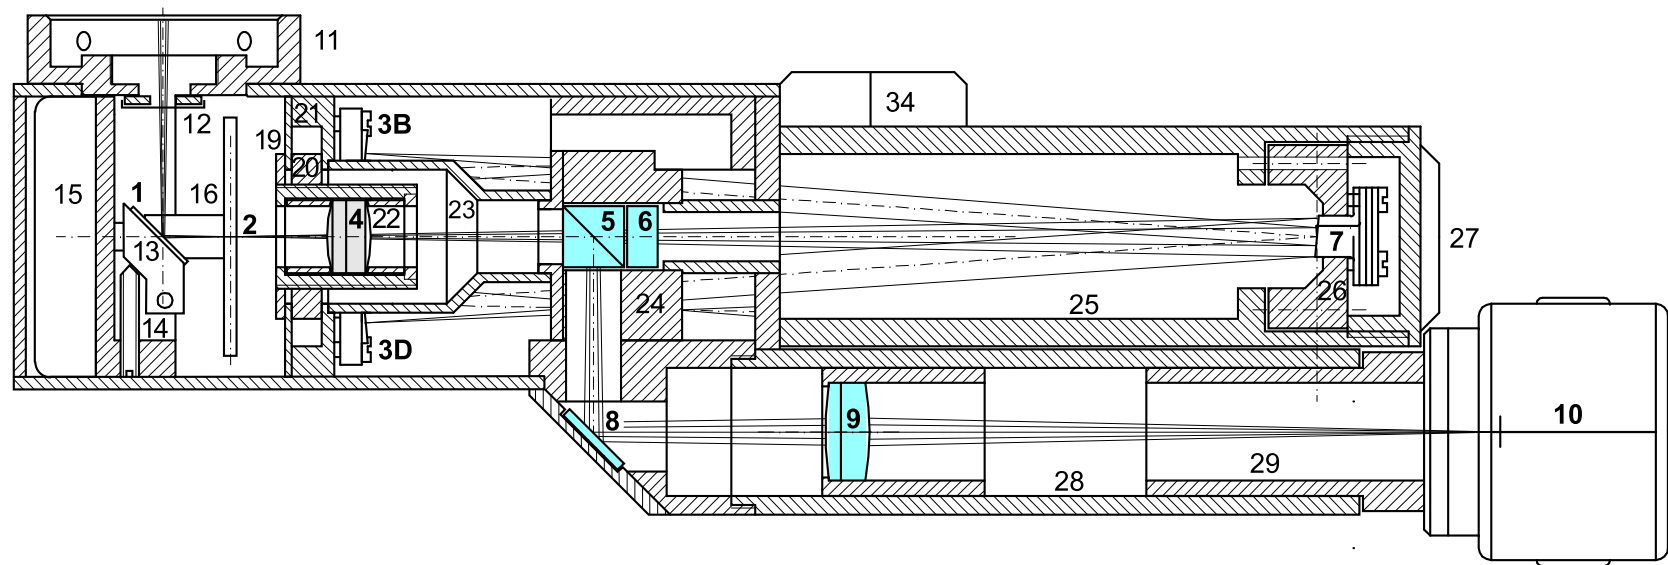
The drawing of MASS side view with partial cross-sections. The photometric modules are not shown. See explanations in the text.
